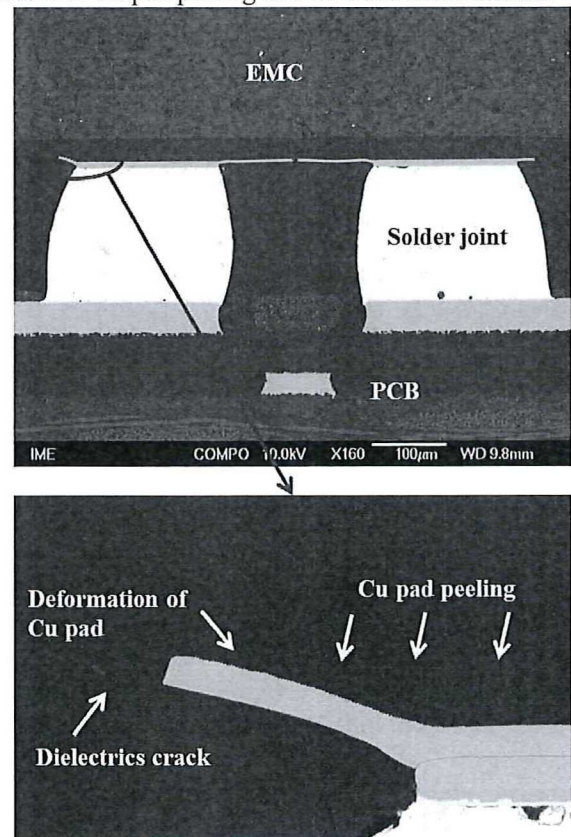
Failure mechanisms of the solder joint at the package edge of bottom RDL-first FOWLP with details of Cu pad peeling and dielectrics crack failures.
